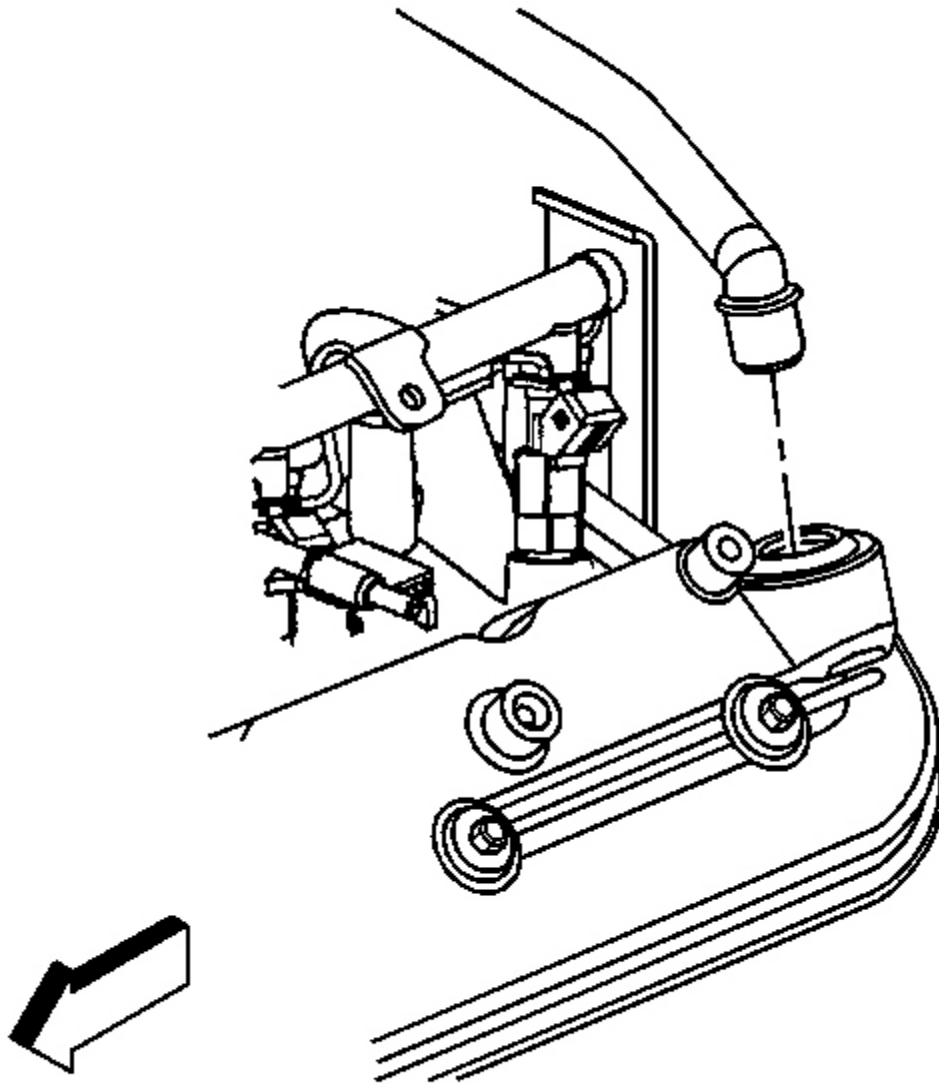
Left Rocker Arm Cover & PCV Valve Pipe
